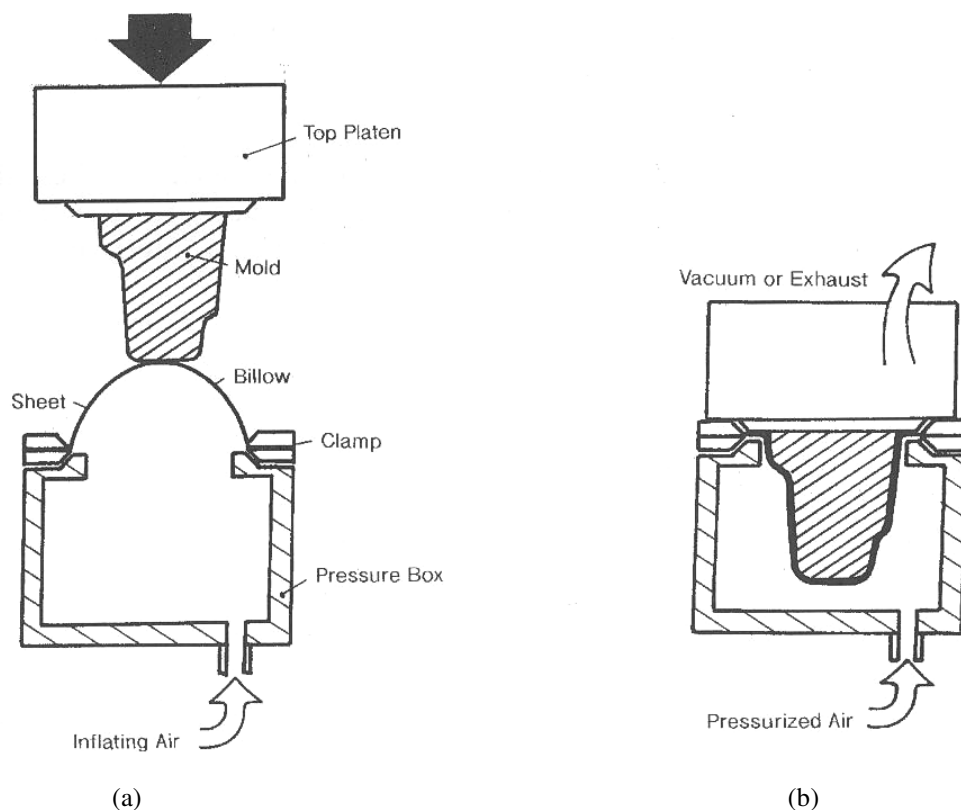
Billow drape forming, assisted by (a) applied air pressure and (b) both air pressure and vacuum to shape the sheet against the mould surface (Throne, 1996).
